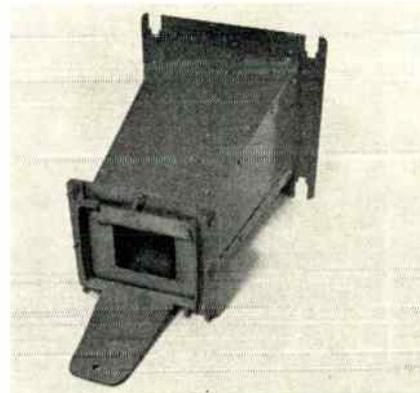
Complete hood assembly before installation of reconstructed camera.
